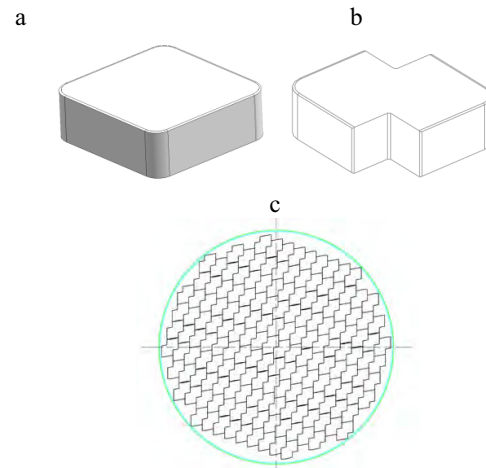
(a) Standard ISO c style insert; (b) Beyond shield insert; (c) Nesting of Beyond shield inserts on a circular disc
